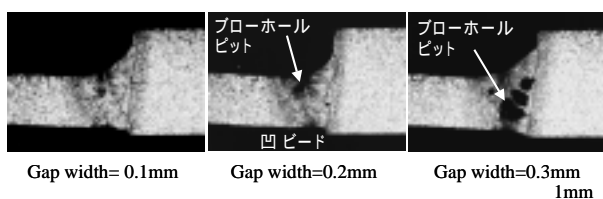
Cross section of laser weld of differential thickness TWB
